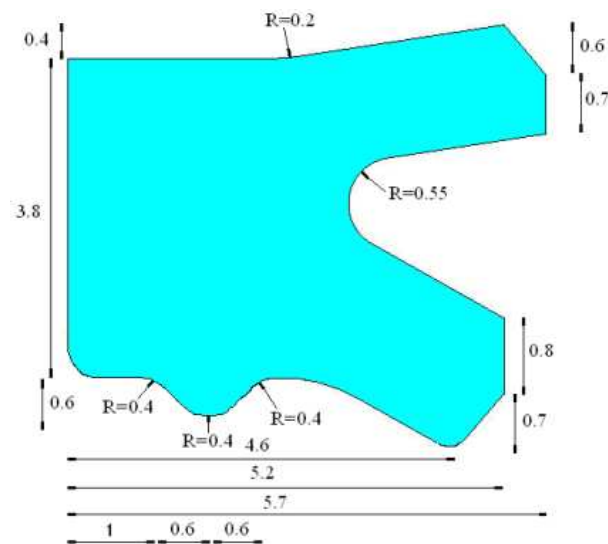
Seal dimensions (mm) assumed in double-lip seal FEA model
